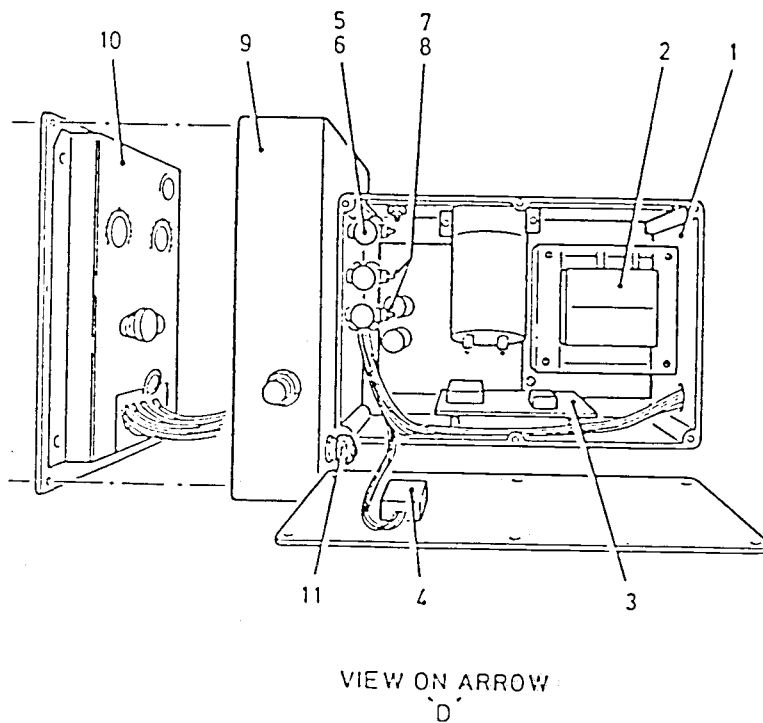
Engine/alternator assembly - view D on Fig. 1
